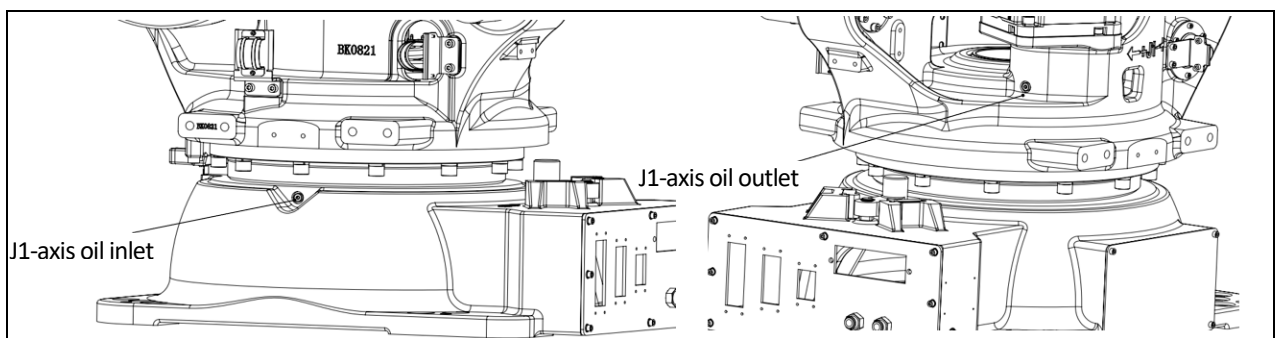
J1-axis oil inlet/outlet (ER270-2700)
